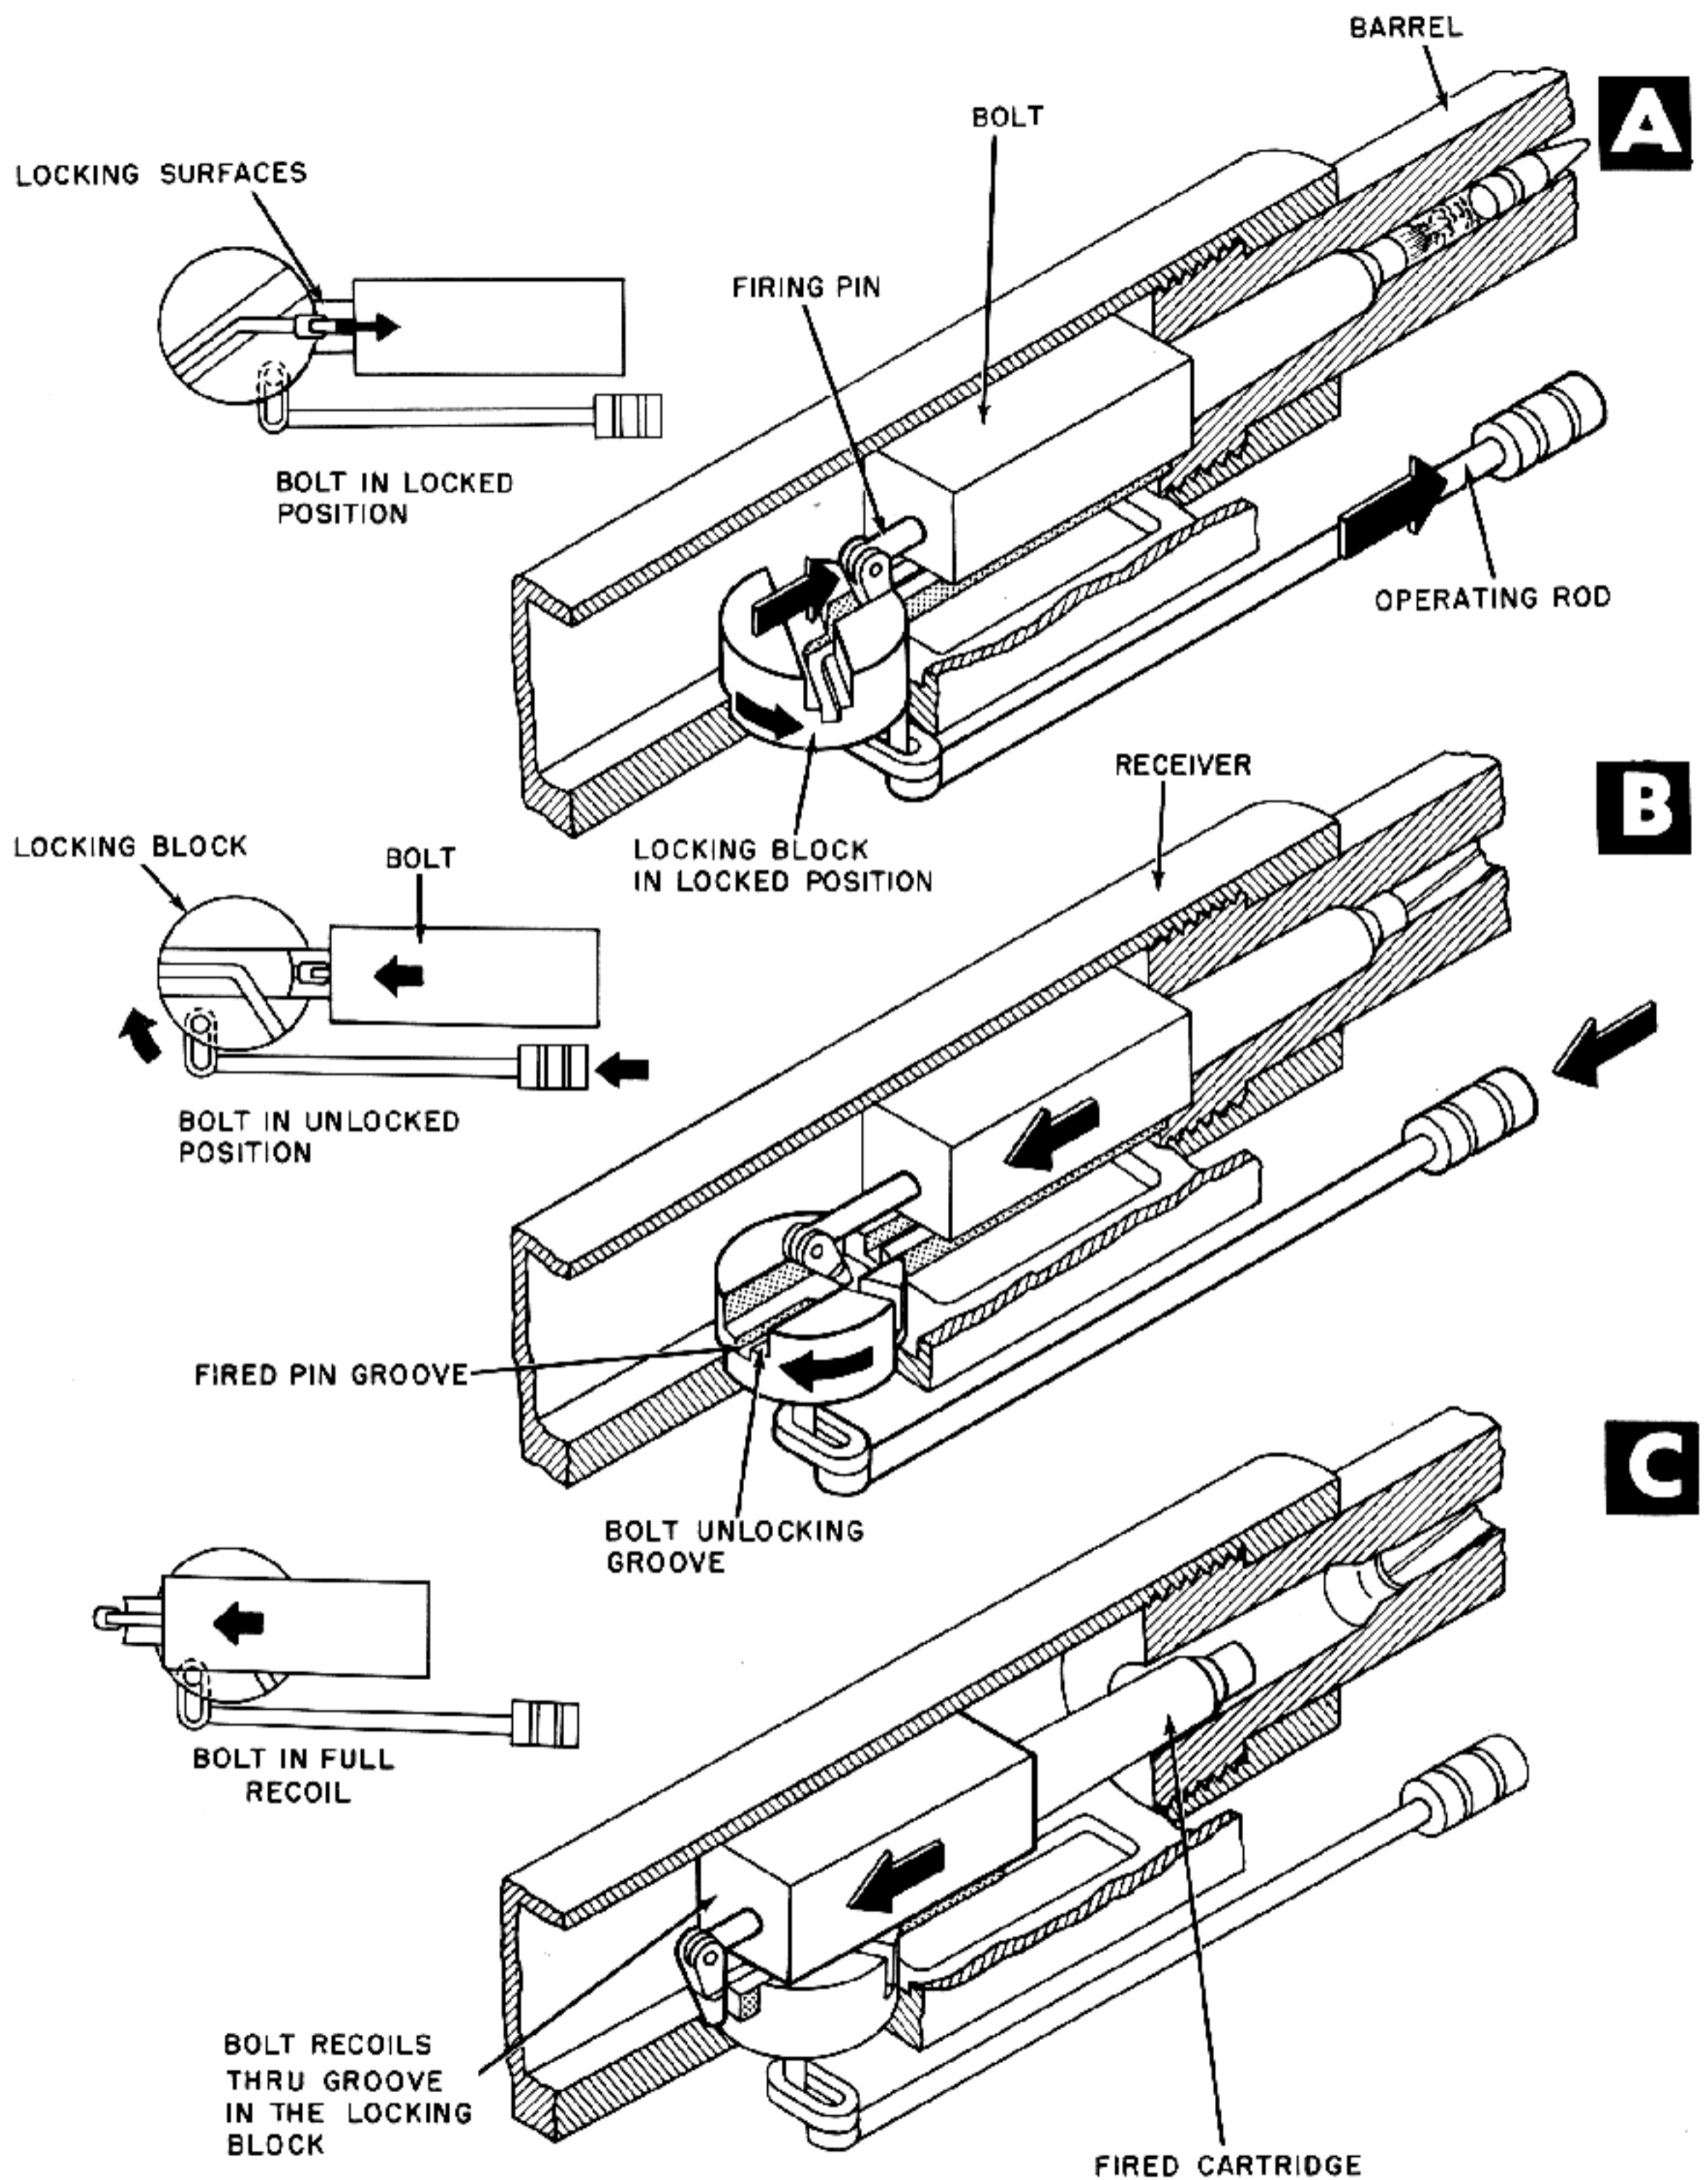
Gas Piston Rotates Locking Block to Unlocked Position.
